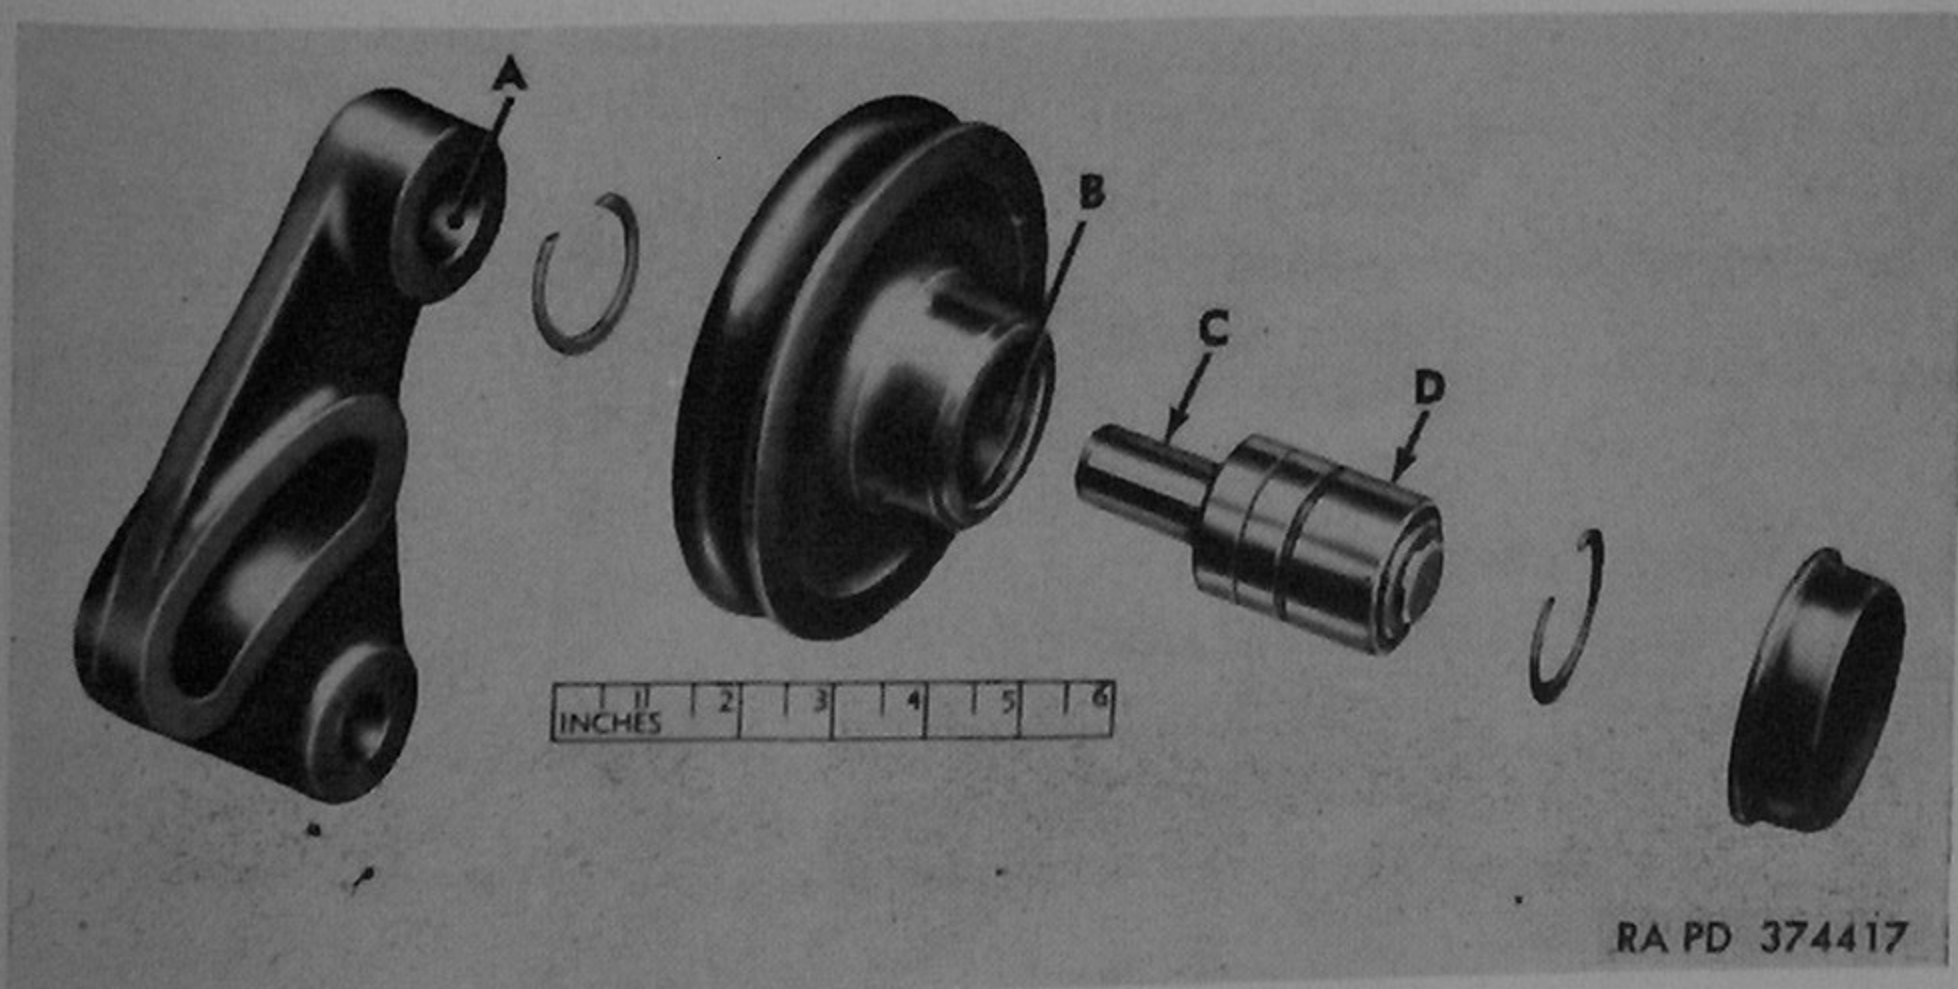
Repair and rebuild standard points of measurement for drive belt idler components (engine assembly 8329440 only).
